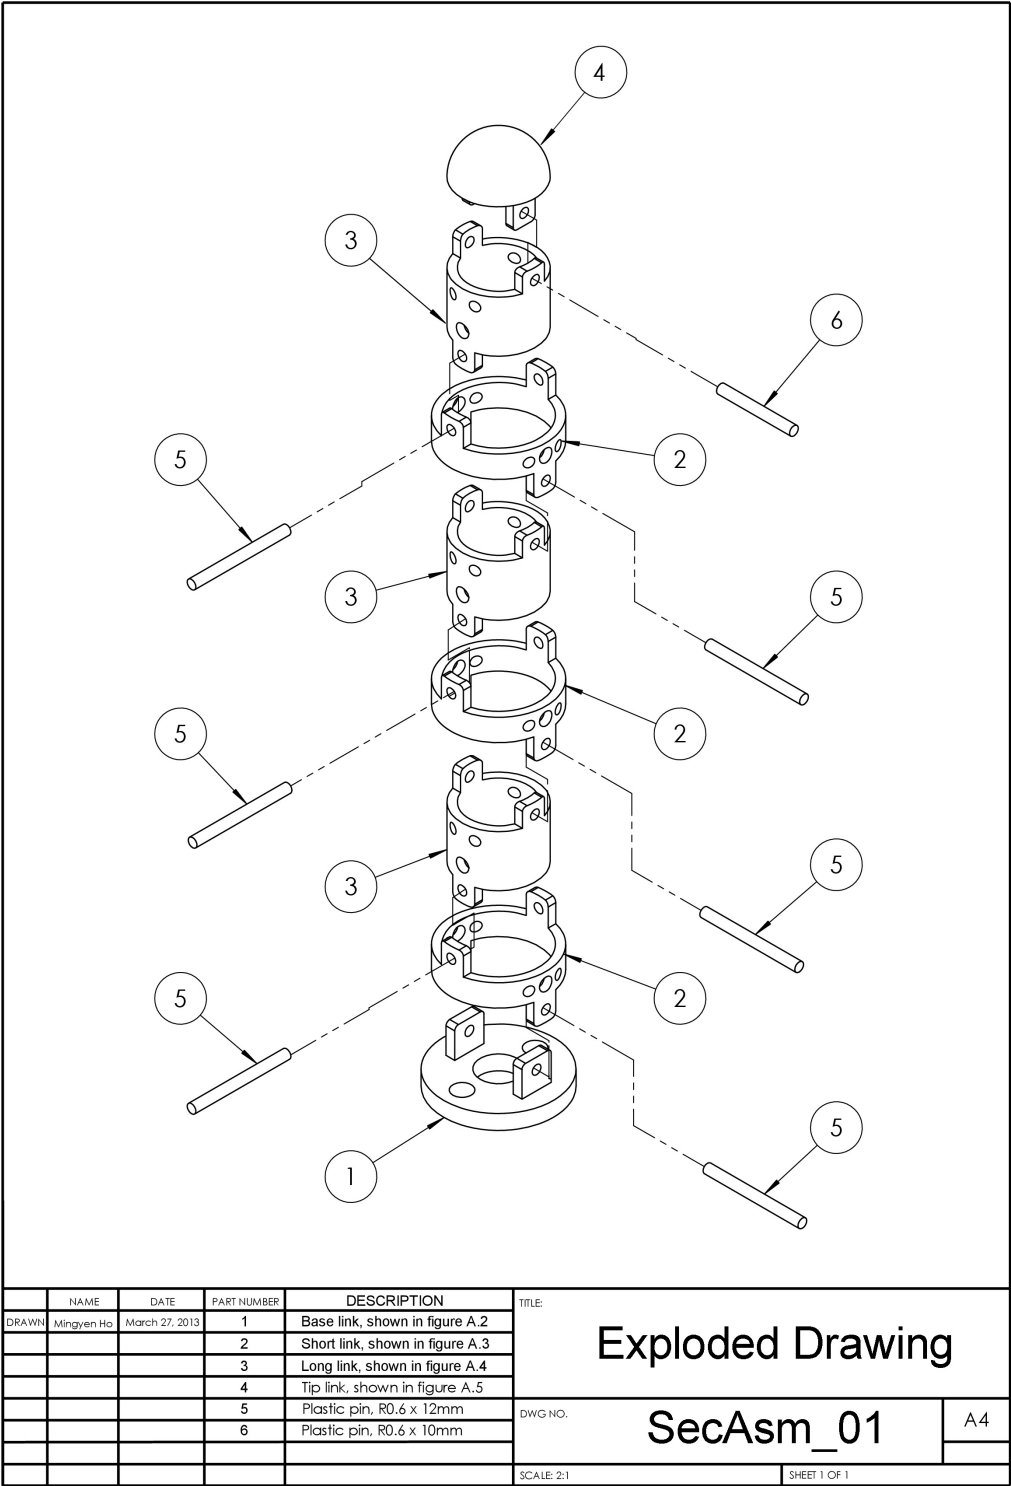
Exploded drawing of the SMA wire actuated MINIR.
